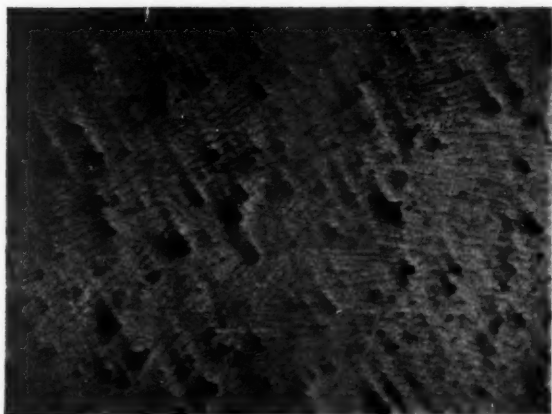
A—SURFACE OF CHILLED THREAD, 20 PER CENT CHARCOAL
